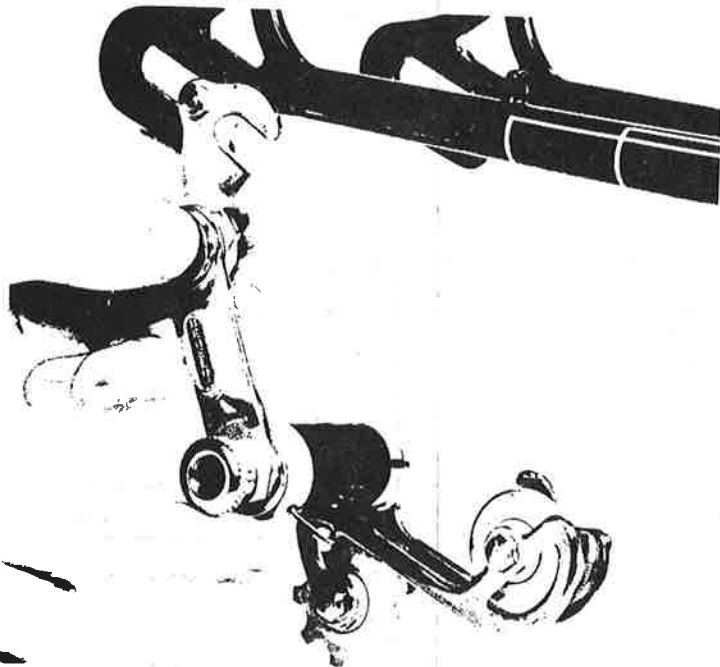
Inserting derailleur gear mechanism into chainstays, after removing wheel from frame.
